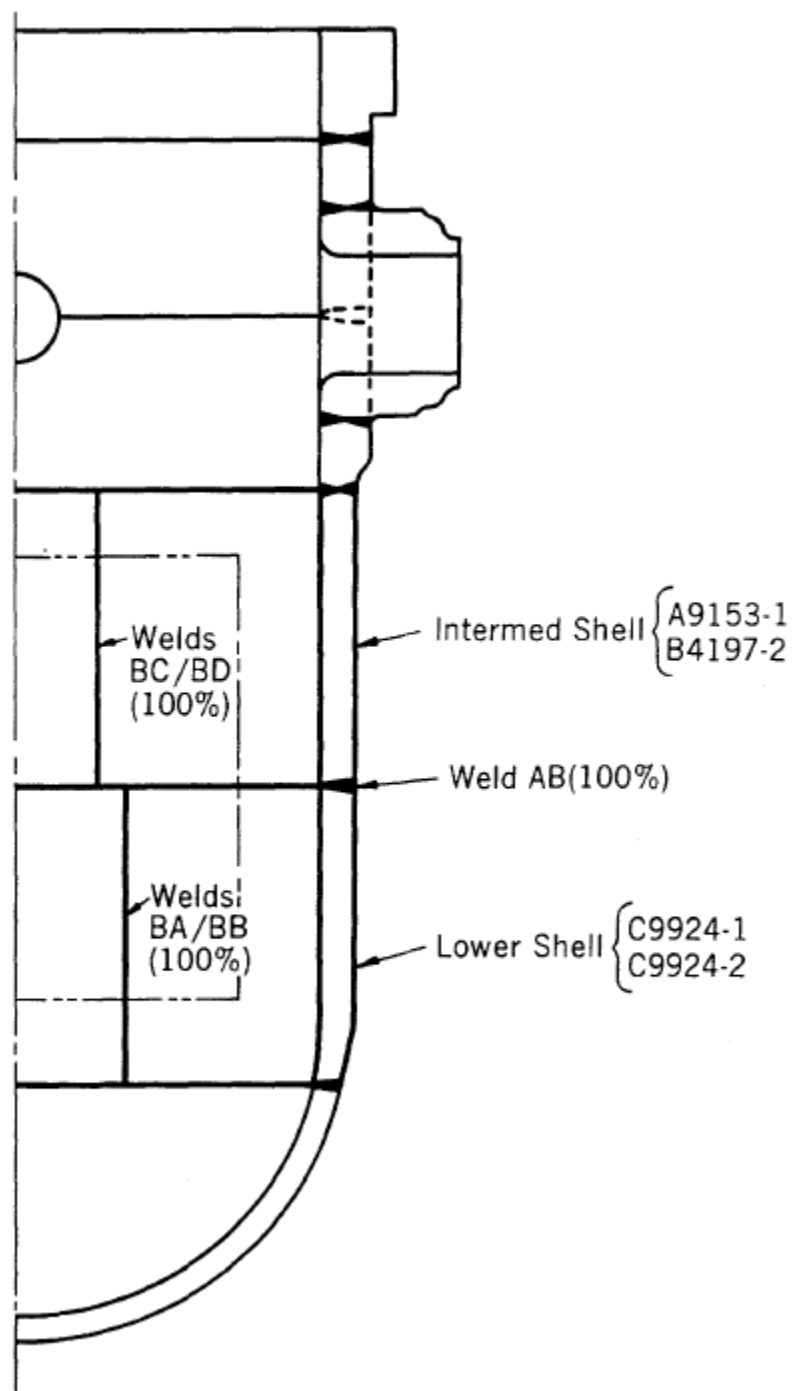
Locations of Longitudinal Welds in HNP Reactor Pressure Vessel Upper and Lower Shell Courses
